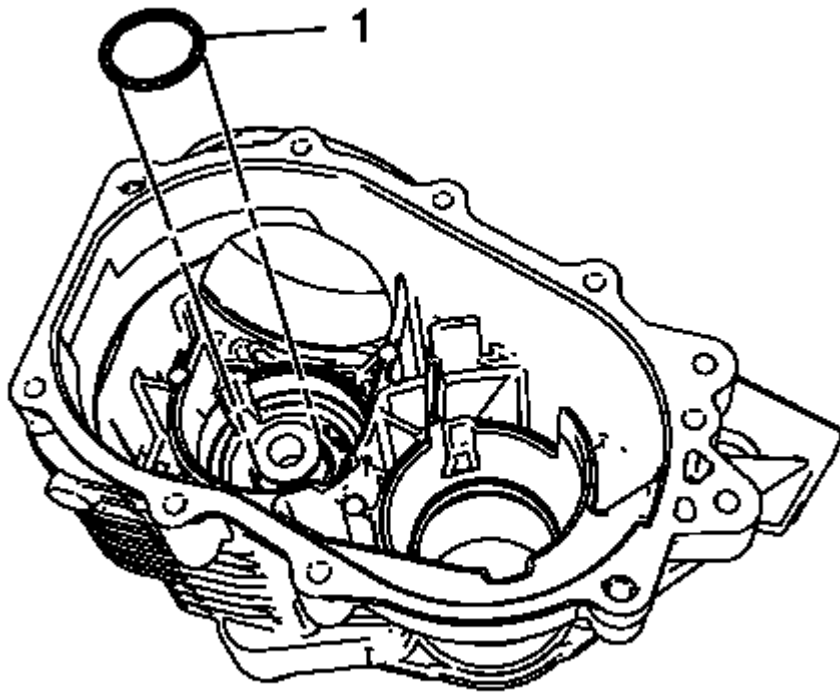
Transfer Case Idler Gear Shaft Front Seal
